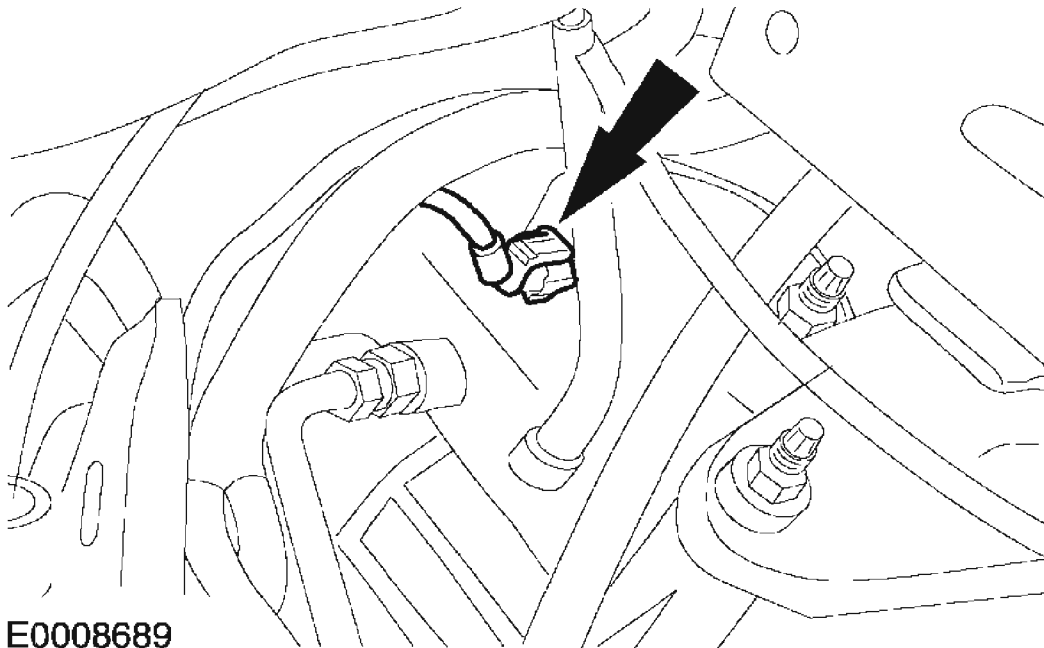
Disconnecting Turbine Shaft Speed (TSS) Sensor Electrical Connector
